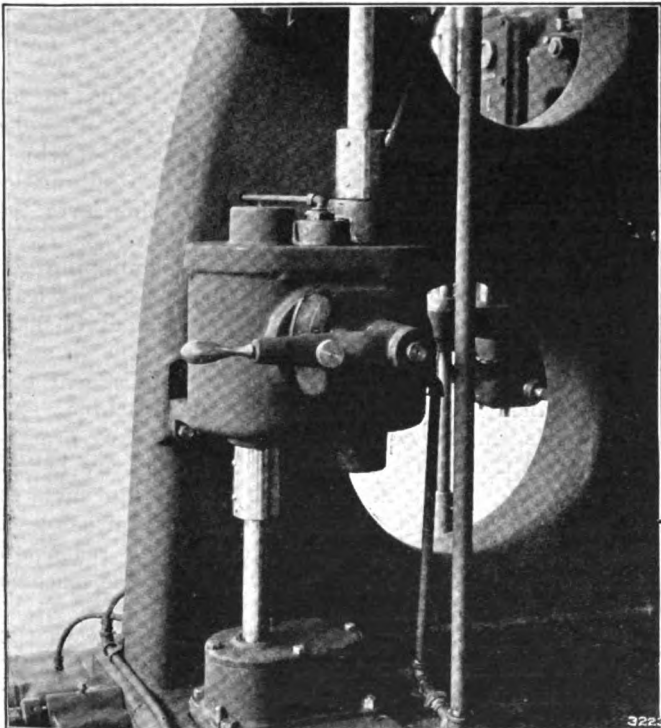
CROSS-RAIL ELEVATING MECHANISM
